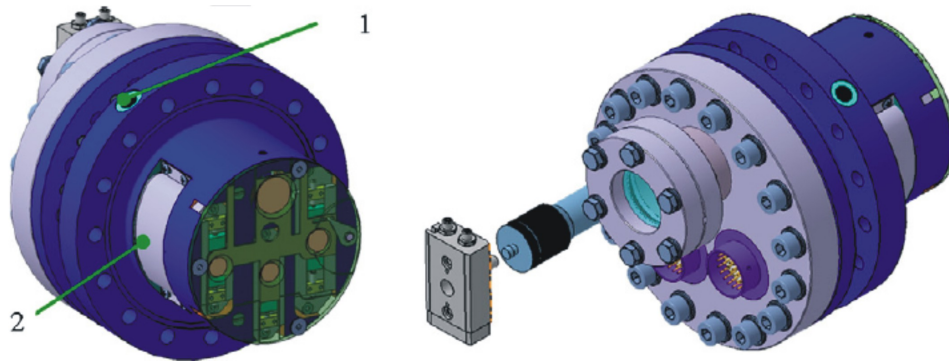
3D view of the assembled port (vacuum side-left picture, atmospheric side-right picture, 1-cooling channel inlet, 2-mounting hole).
